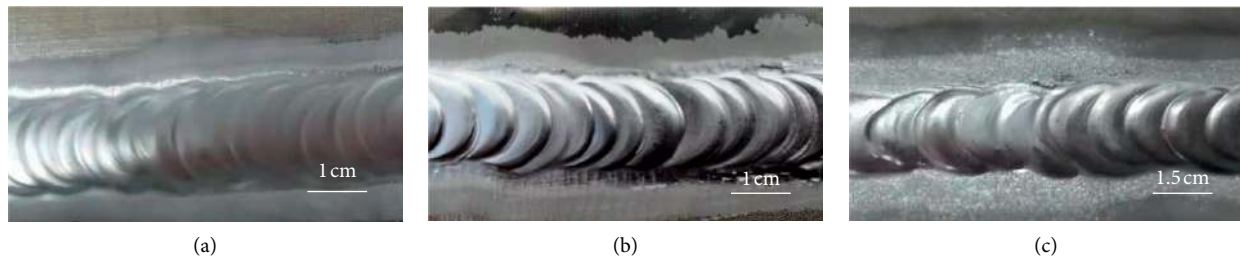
Weld bead morphology after welding with different welding wires. (a) Pure 7055 weld bead. (b) 1.5 wt.% ZrB<sub>2</sub>/7055 weld bead. (c) 1.5 wt.% ZrB<sub>2</sub>/Al-Mg weld bead.
